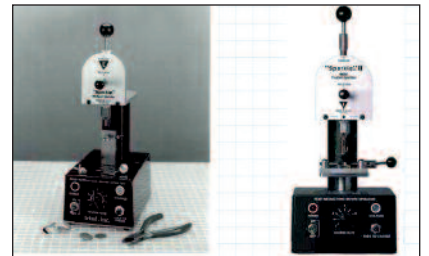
A low-cost fusion welder. (Courtesy J. Alves)
